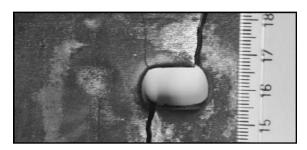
Primary and secondary cracks in a leaf with a rectangular hole after fatigue testing.
